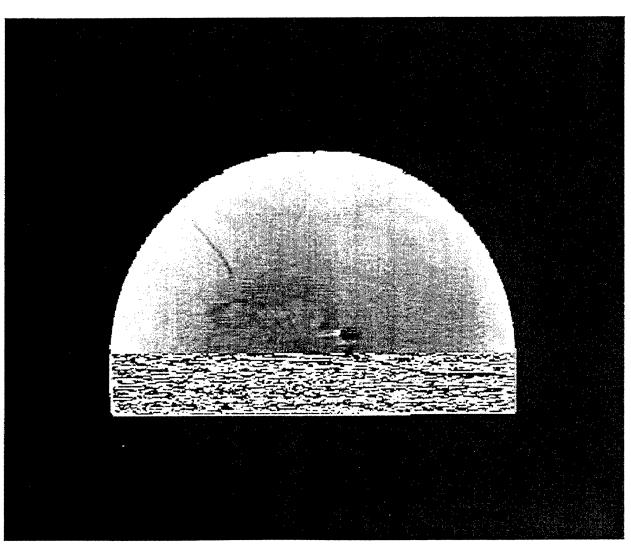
23.35 mm from bottom of disk with 65° rotation about X-axis.
